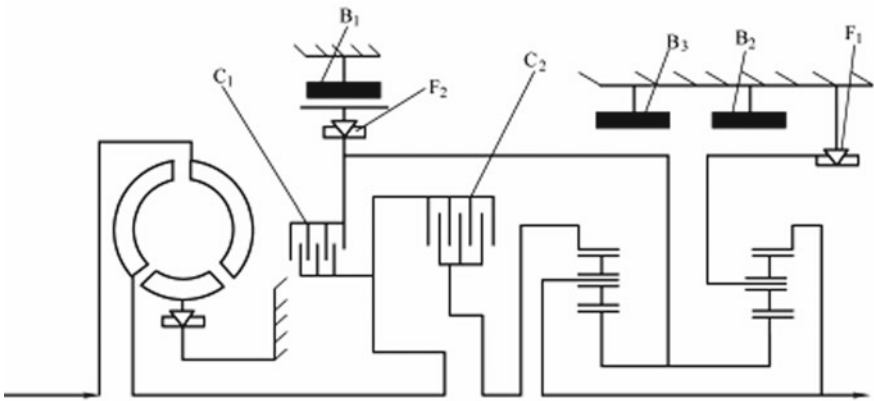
Improved 3 speed Simpson planetary gear train. B₁—2 speed brake, B₂—low and reverse gear brake, B₃—2 speed force brake, C₁—reverse and high gear clutch, C₂—forward clutch, F₁—low-gear OWC, F₂—2 speed OWC
